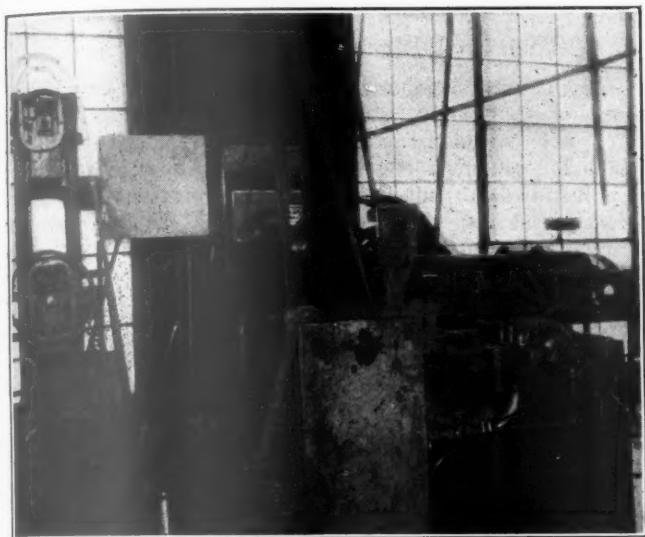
Close-Up of Thompson Superheater Flue Electric Welding Machine
